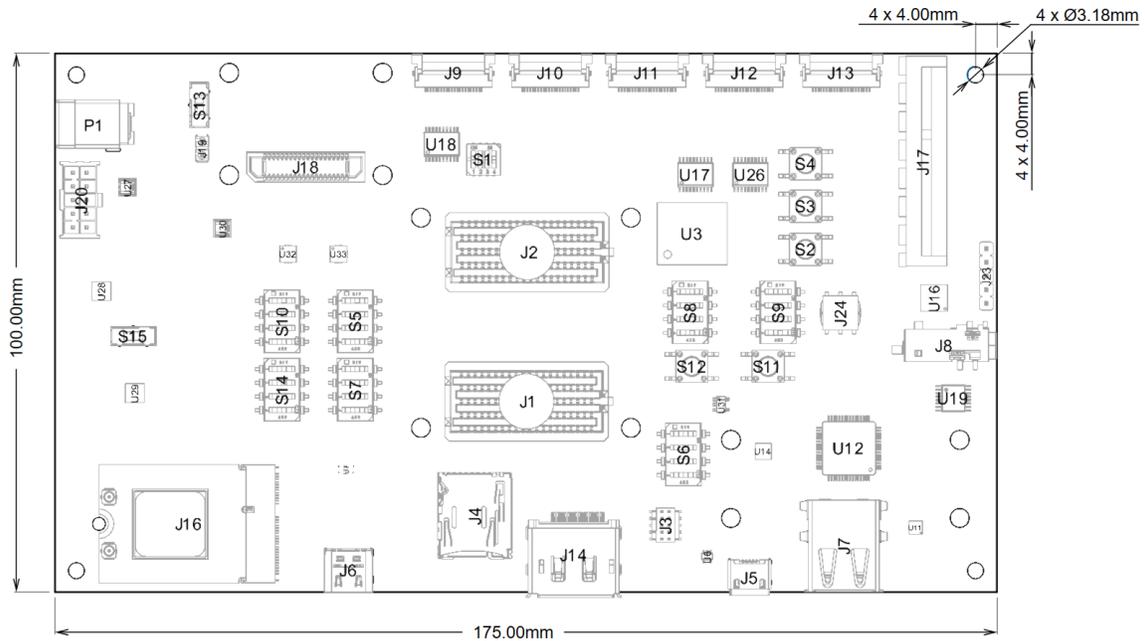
MitySOM-QC6490/5430 Development Kit Outline and Mounting Hole Locations (Top View, millimeters)
